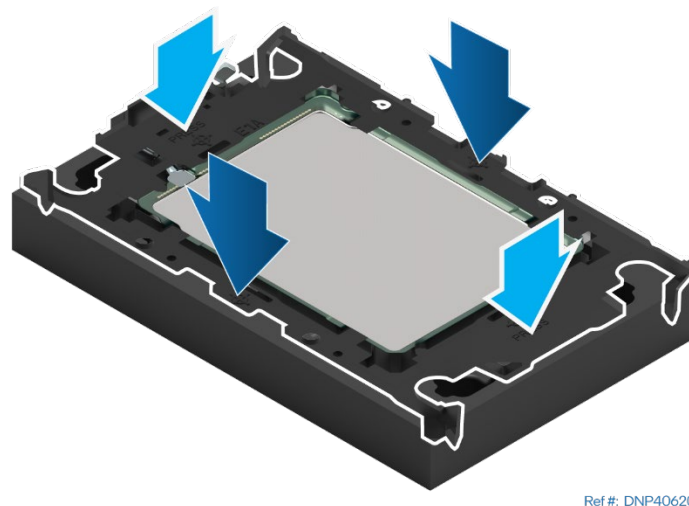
Installing the Processor Carrier Clip onto the Processor – Part 2
